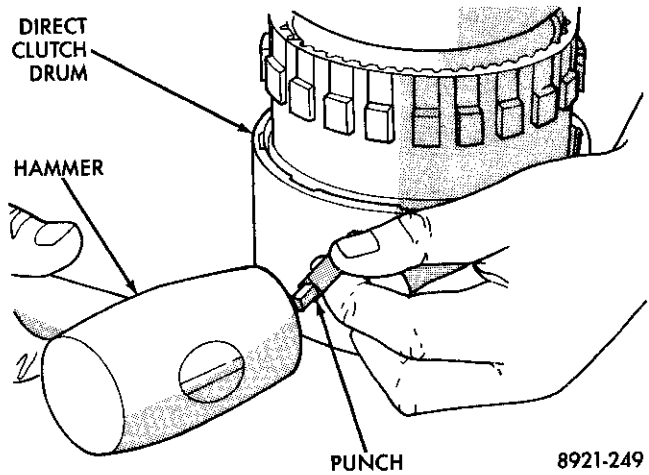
Marking Direct Clutch Drum And Annulus Gear For Assembly Alignment
